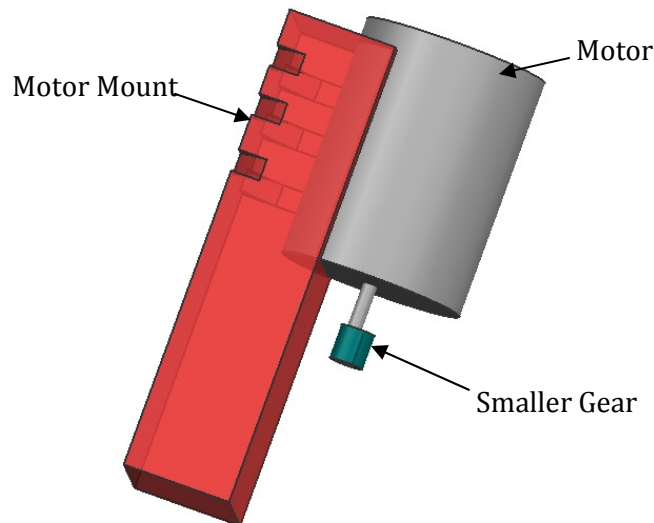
MOTOR MOUNT WITH SMALLER GEAR ATTACHED
